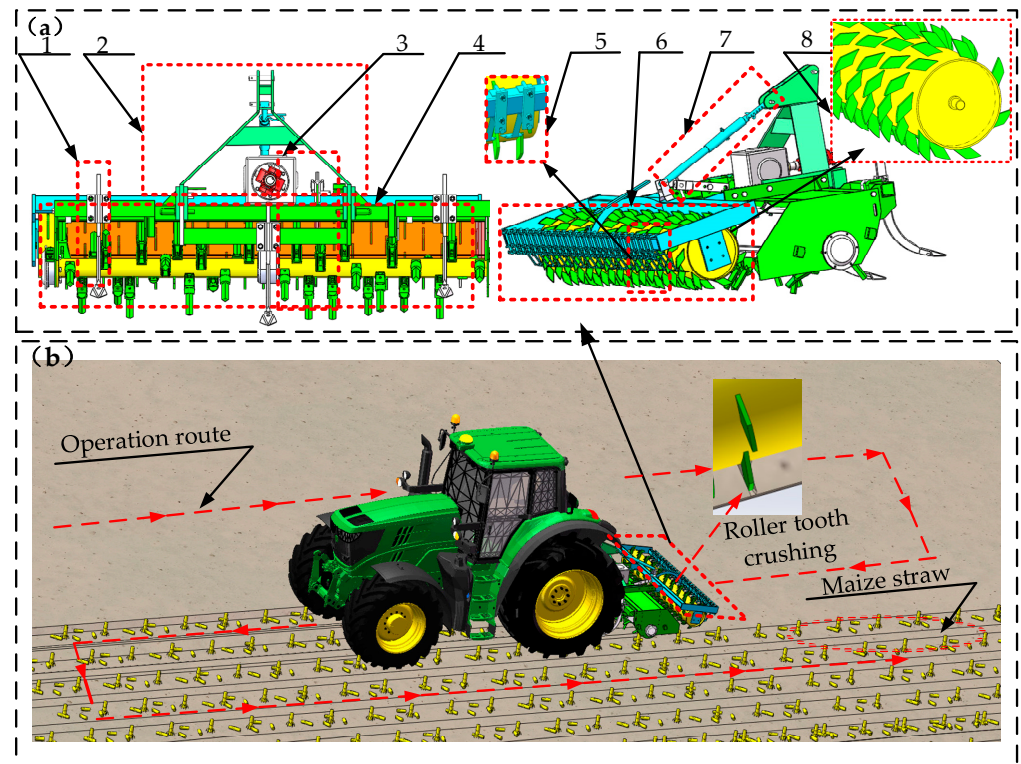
(a) Overall structure of the combined soil preparation equipment: 1. Deep loosening device; 2. suspension device; 3. transmission device; 4. soil-breakage device; 5. soil-scraping device; 6. press device; 7. upper link device; and 8. press device. (b) Combined soil preparation equipment operating condition.
